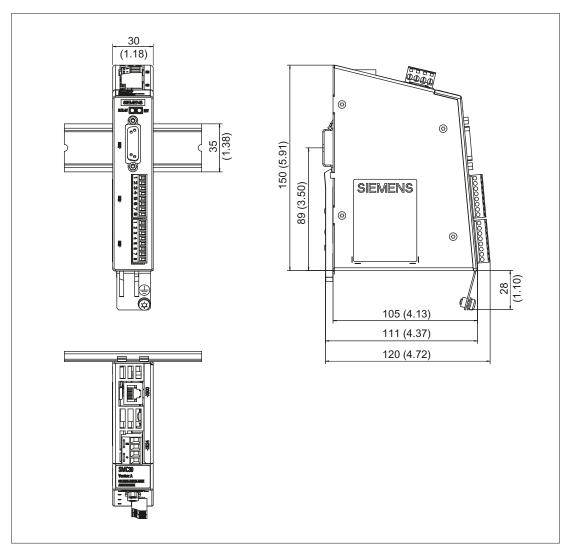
Dimension drawing of the Sensor Module Cabinet SMC30, all data in mm and (inches)
